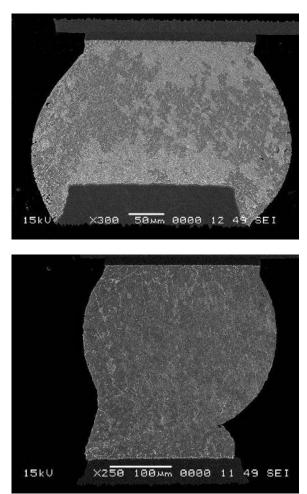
Proper solder joint formation (top) is possible with current solder technologies. Changes in alloy composition can make it impossible to form good solder joints (bottom) within HP's process window, thereby failing HP's requirements.
